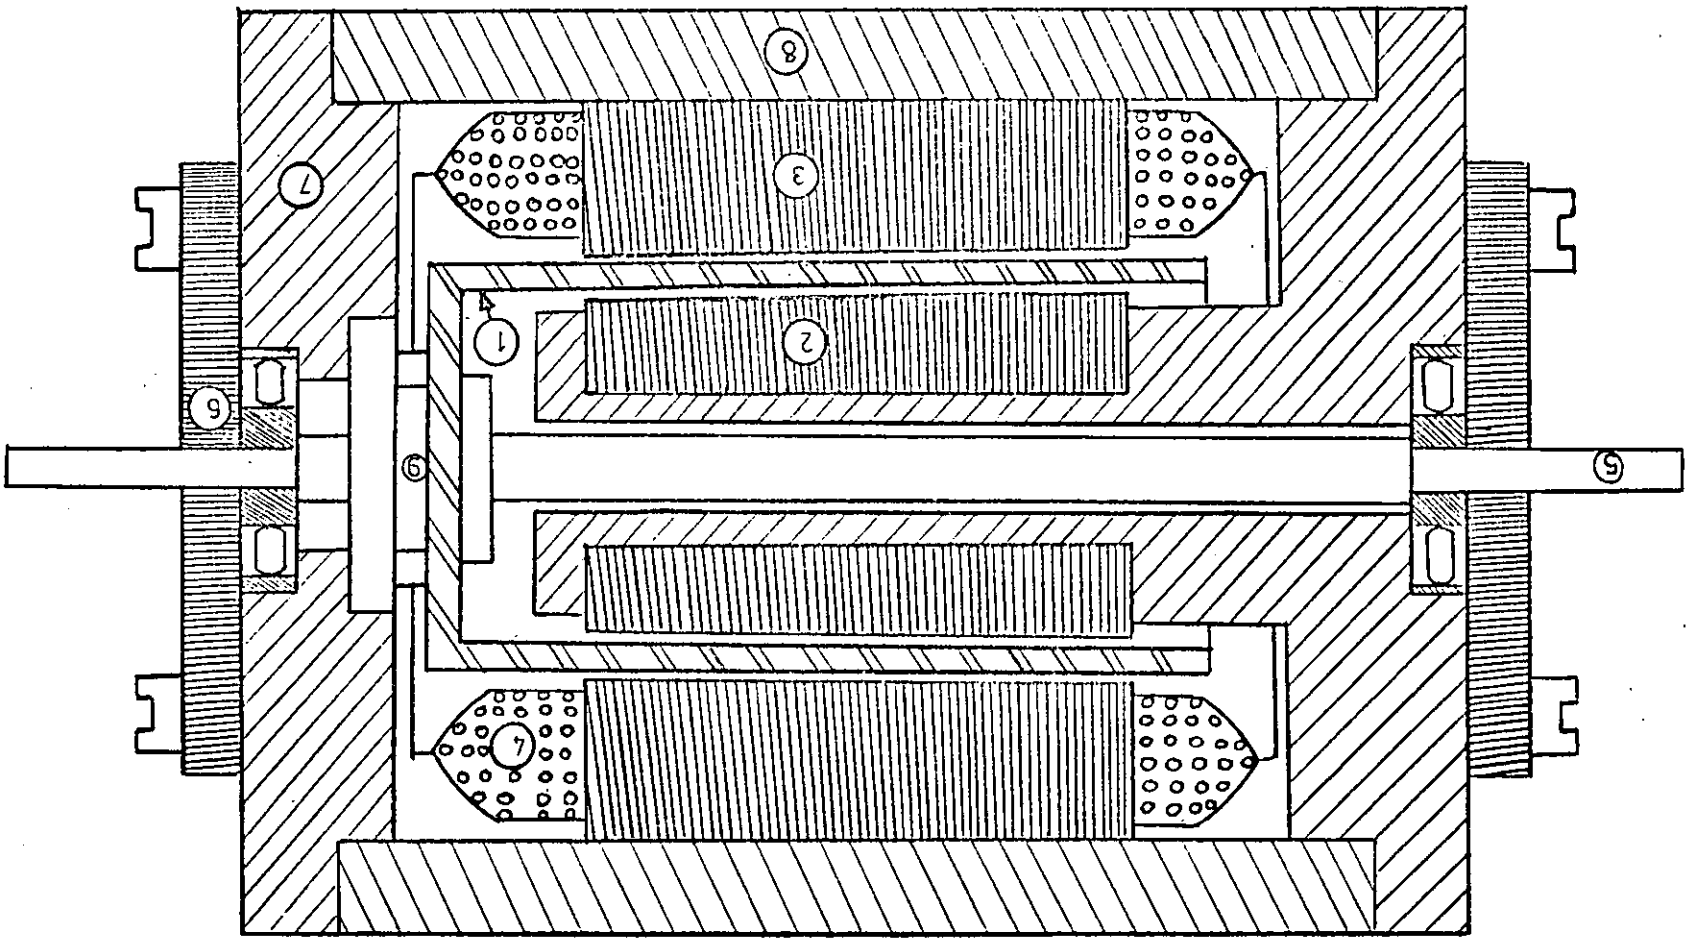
Cut away view of ac squirrel-cage rotor servomotor
